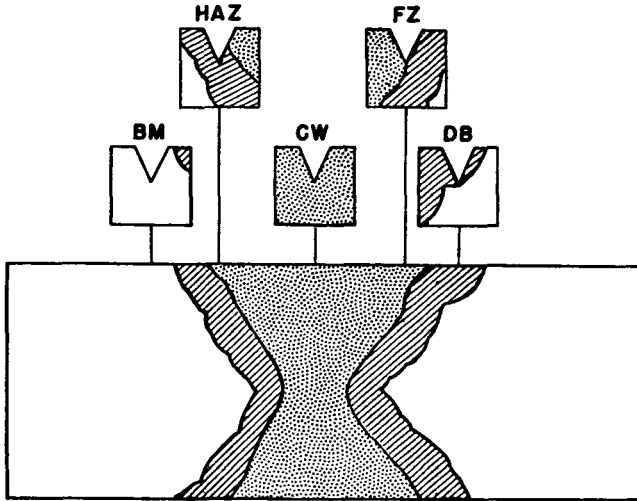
Locations of fatigue crack tipped notches (ref. 52).
